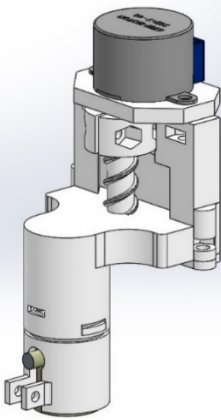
Finished CAD model in SOLIDWORKS of the dovetail slide design.
